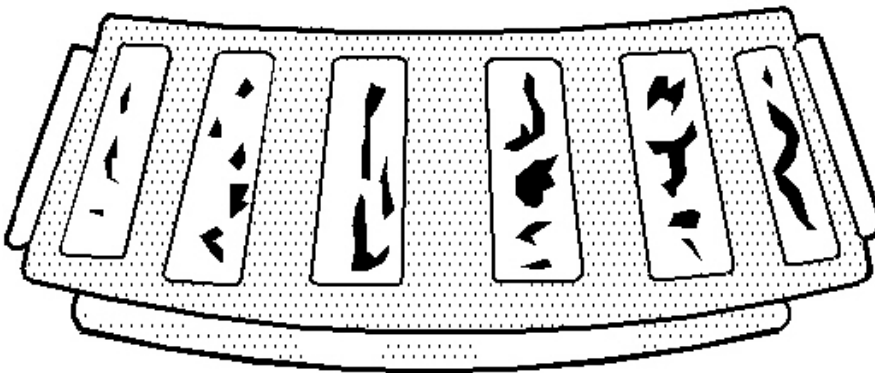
Inspecting Bearing Rollers & Races For Pitting, Grooves, Spalling & Excessive Wear
